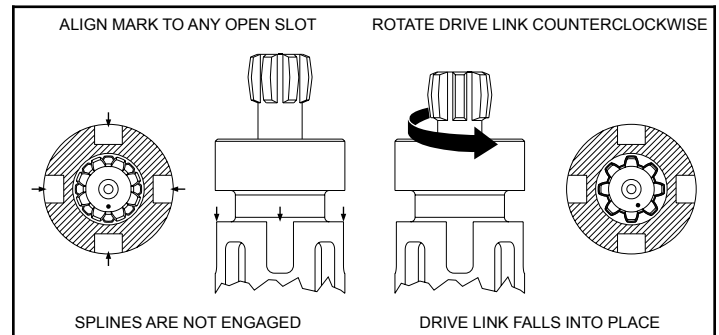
DRIVE LINK / SHAFT TIMING
